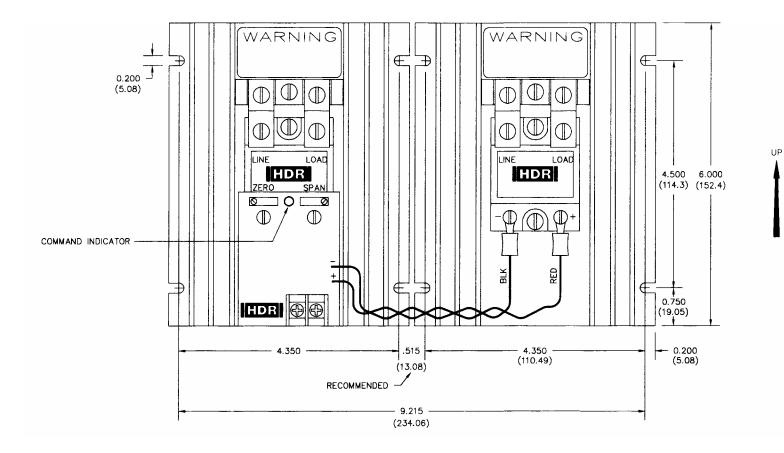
OUTLINE and MOUNTING DIMENSIONS ZF2 – 70A
